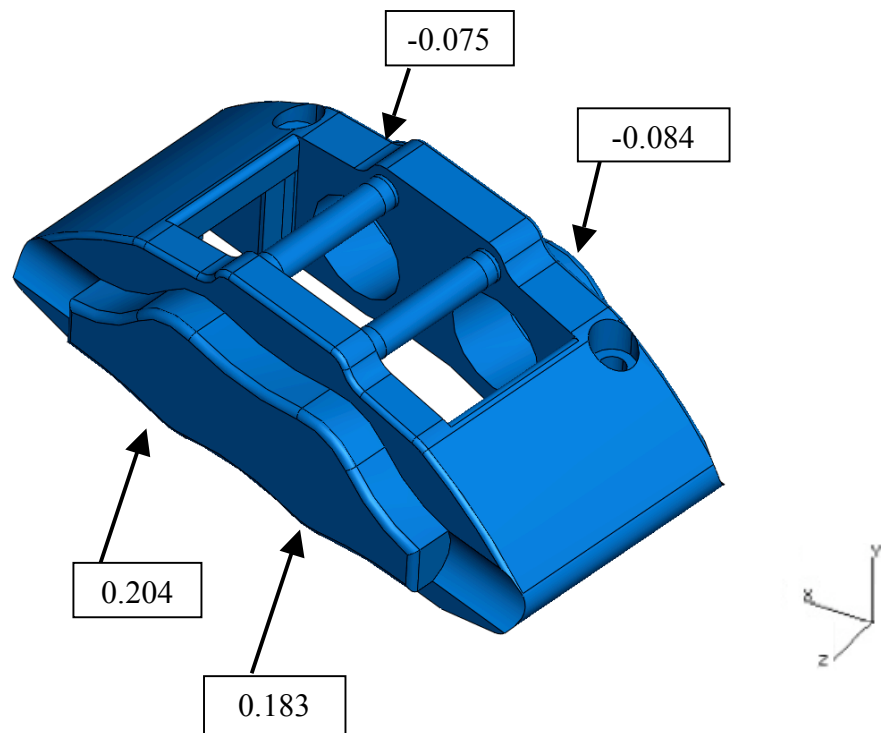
Caliper bore displacement on the "z" axis (mm).
